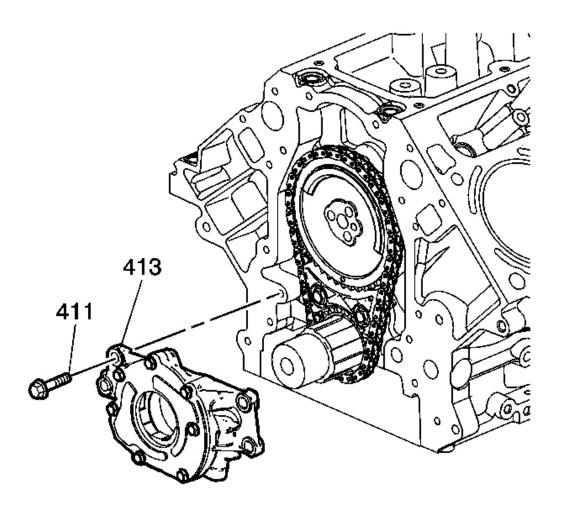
Removing/Installing Oil Pump Bolts Courtesy of GENERAL MOTORS CORP.
